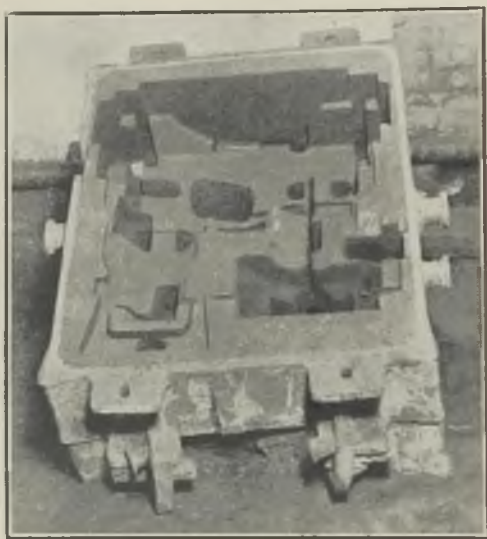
COPE HALF OF GEAR-CASE MOULD.
